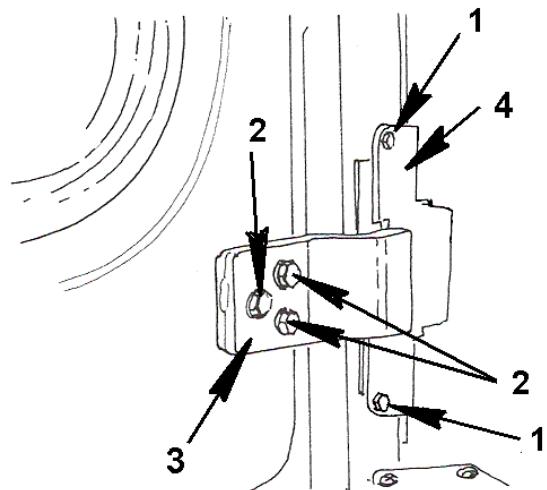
Emergency Exit Door Hinge and Bolt Removal
